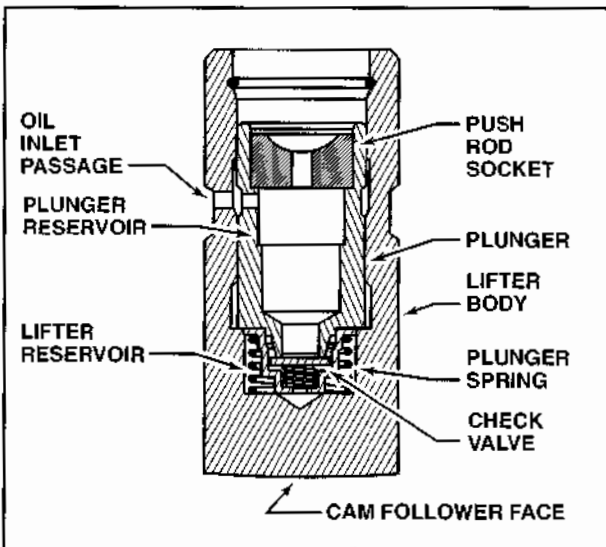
Some hydraulic lifters use a disk-type check valve instead of a ball-type.
